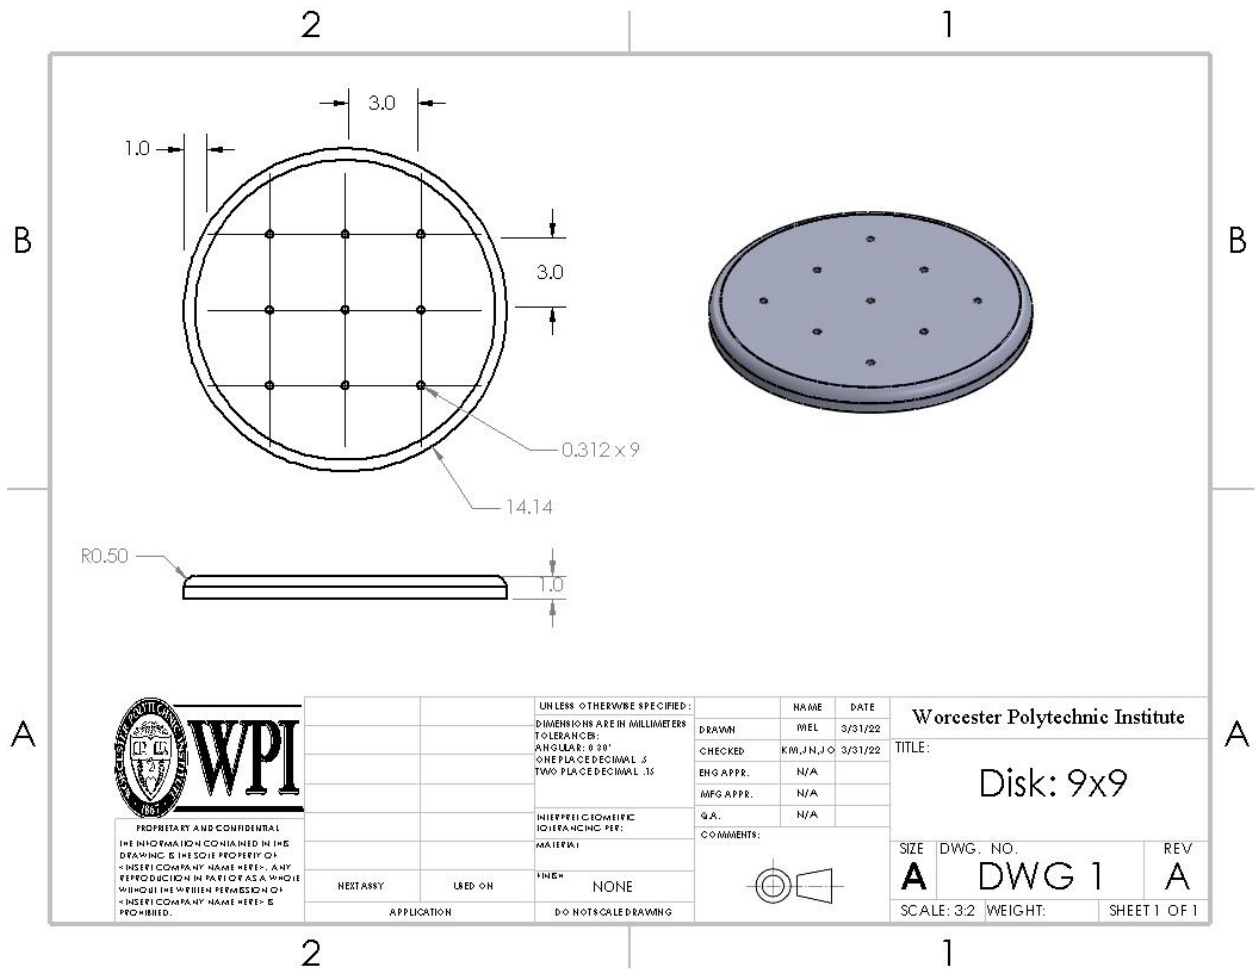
CAD Drawing of the disk with a 9x9 hole array.
